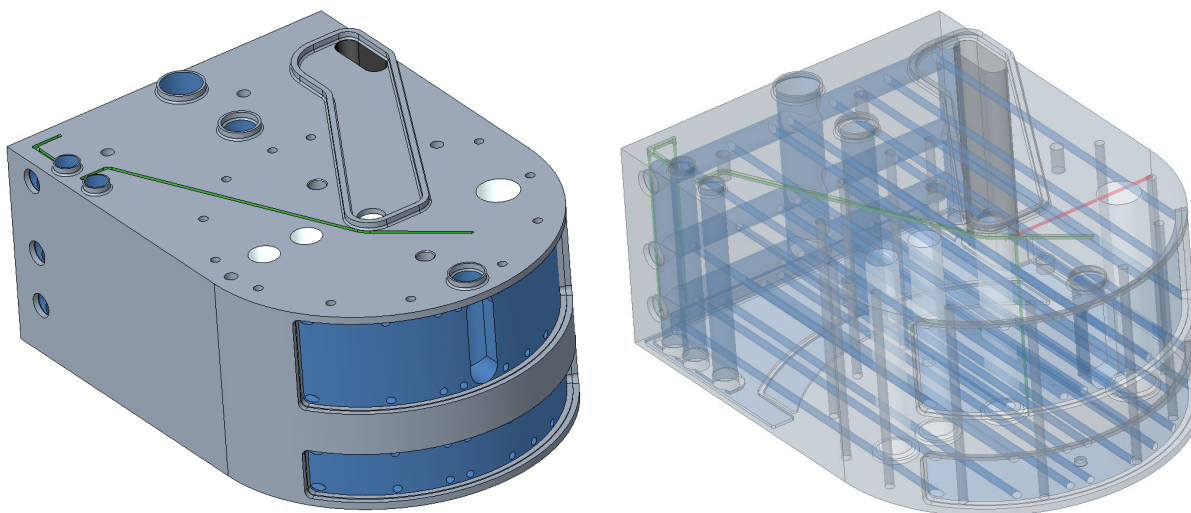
Upper backbone plate machined from stainless steel plate. Cooling holes are shown in blue, bolt holes in grey, leak check access hole in red, and thermocouple wells and routing in green.
